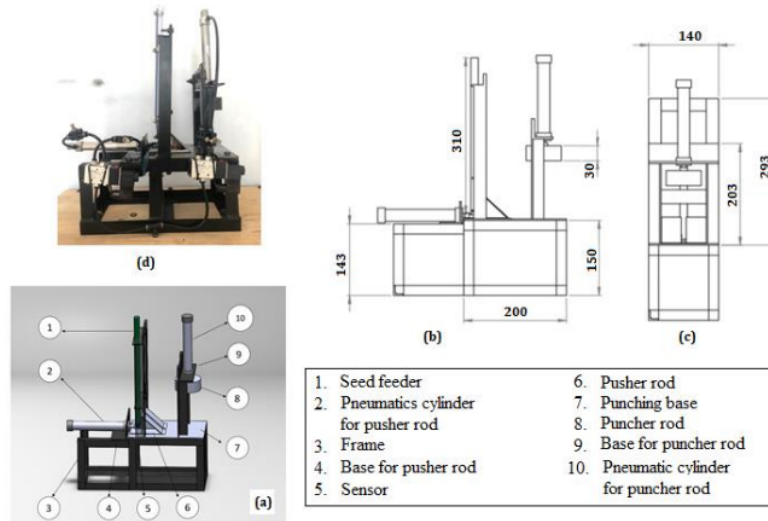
Automatic flattened melinjo seed machine, a) design, b) physical construction
